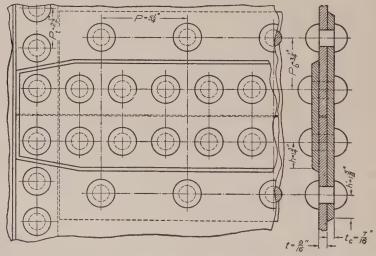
Double-Riveted Butt Joint Joining Single-Riveted Lap Joint.
